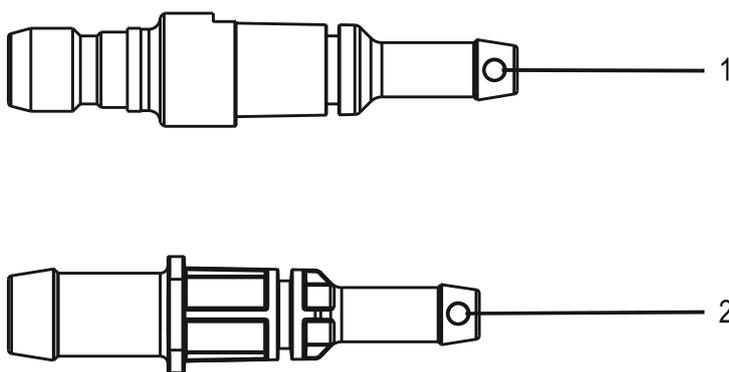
Double Tubing Connector 34562278 and 34562279
